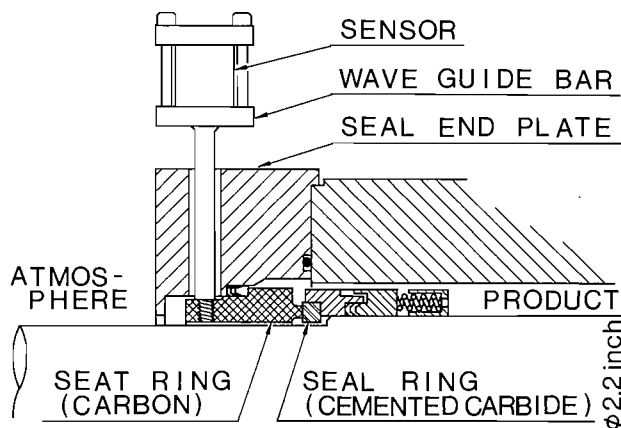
Mounting of a Sensor on a Mechanical Seal.
